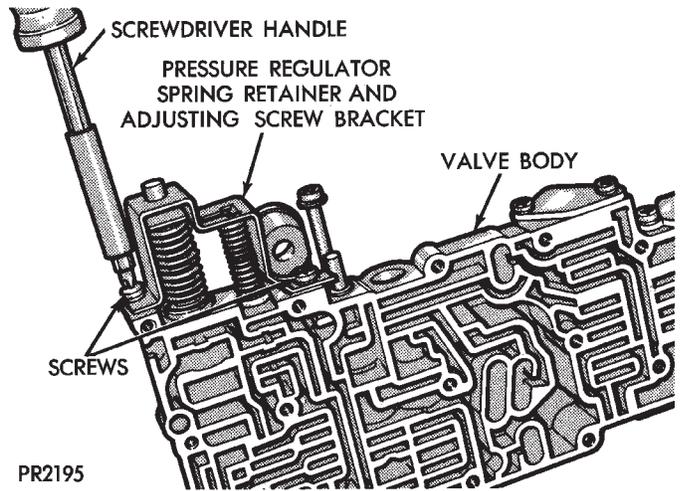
Pressure Regulator and Adjusting Screw Bracket
